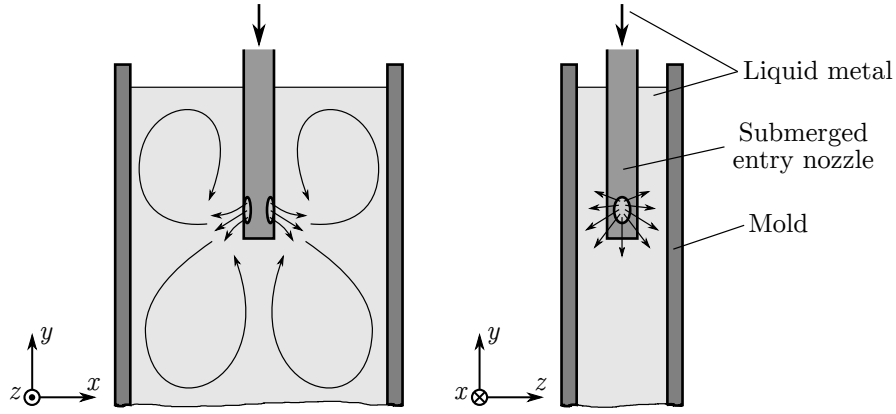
Mold of the continuous casting model used to perform the tests. Liquid metal flows inside the mold through the submerged entry nozzle.
